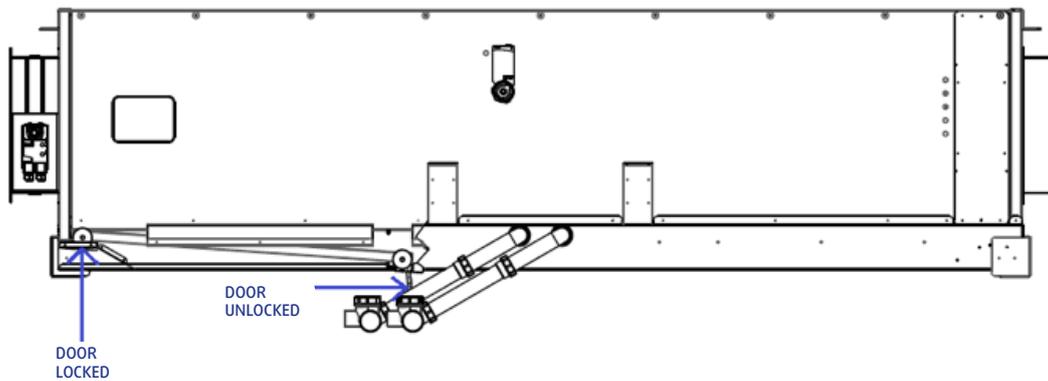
Opening the Door By Unlocking From a Single Direction
